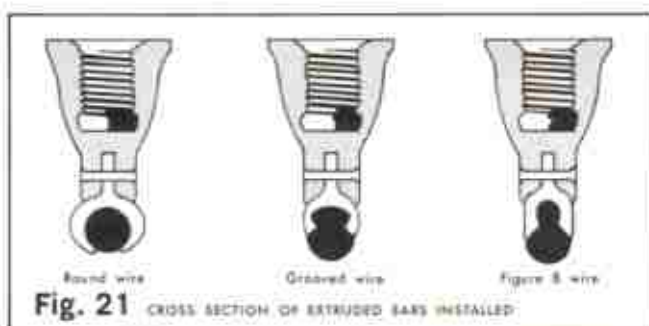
CROSS SECTION OF EXTRUDED BARS INSTALLED
